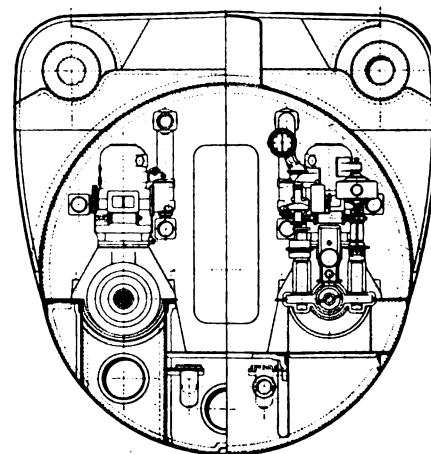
SUBMARINE BOAT EQUIPPED WITH TWO KOERTING SIX-CYLINDER OIL ENGINES.
